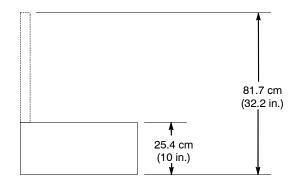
Mounting Dimensions and Clearance Requirements (Bottom View)
